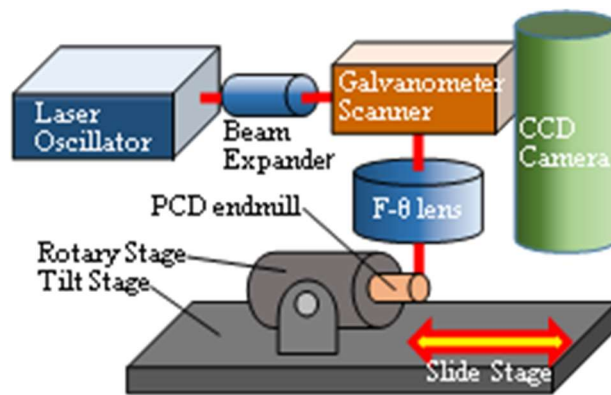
Tool forming machine with ultrashort pulse laser.
